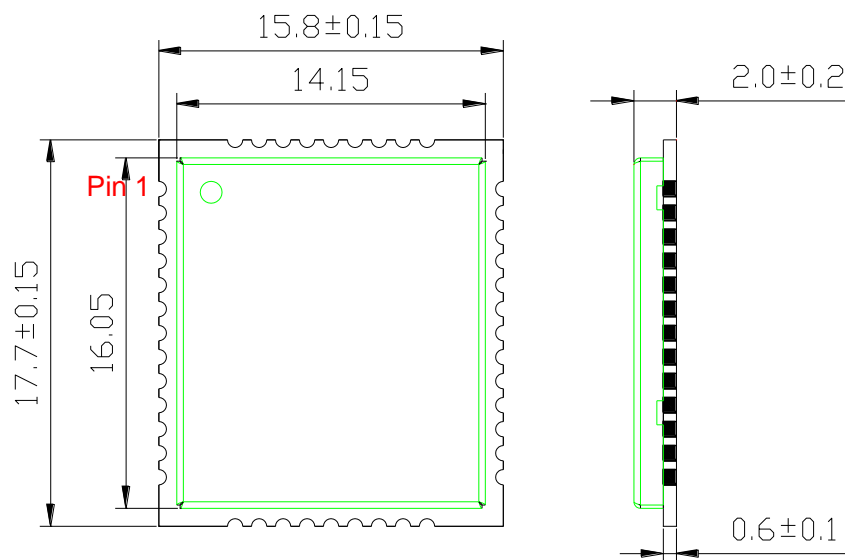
BC66 Top and Side Dimensions (Unit: mm)
